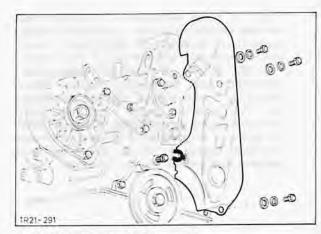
Remove toothed belt guard (fan removed for clarity)
